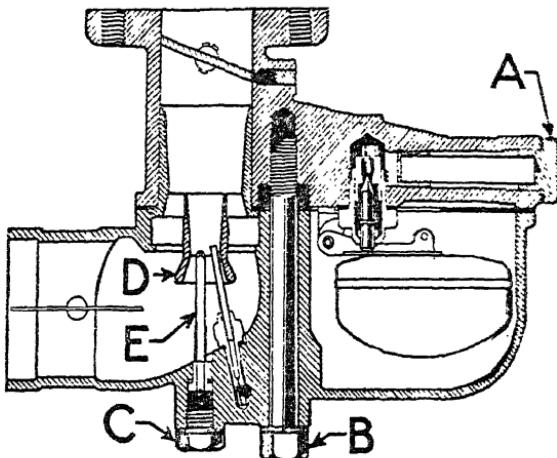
Sectional View of Ford Model "A" Car Carburetor
